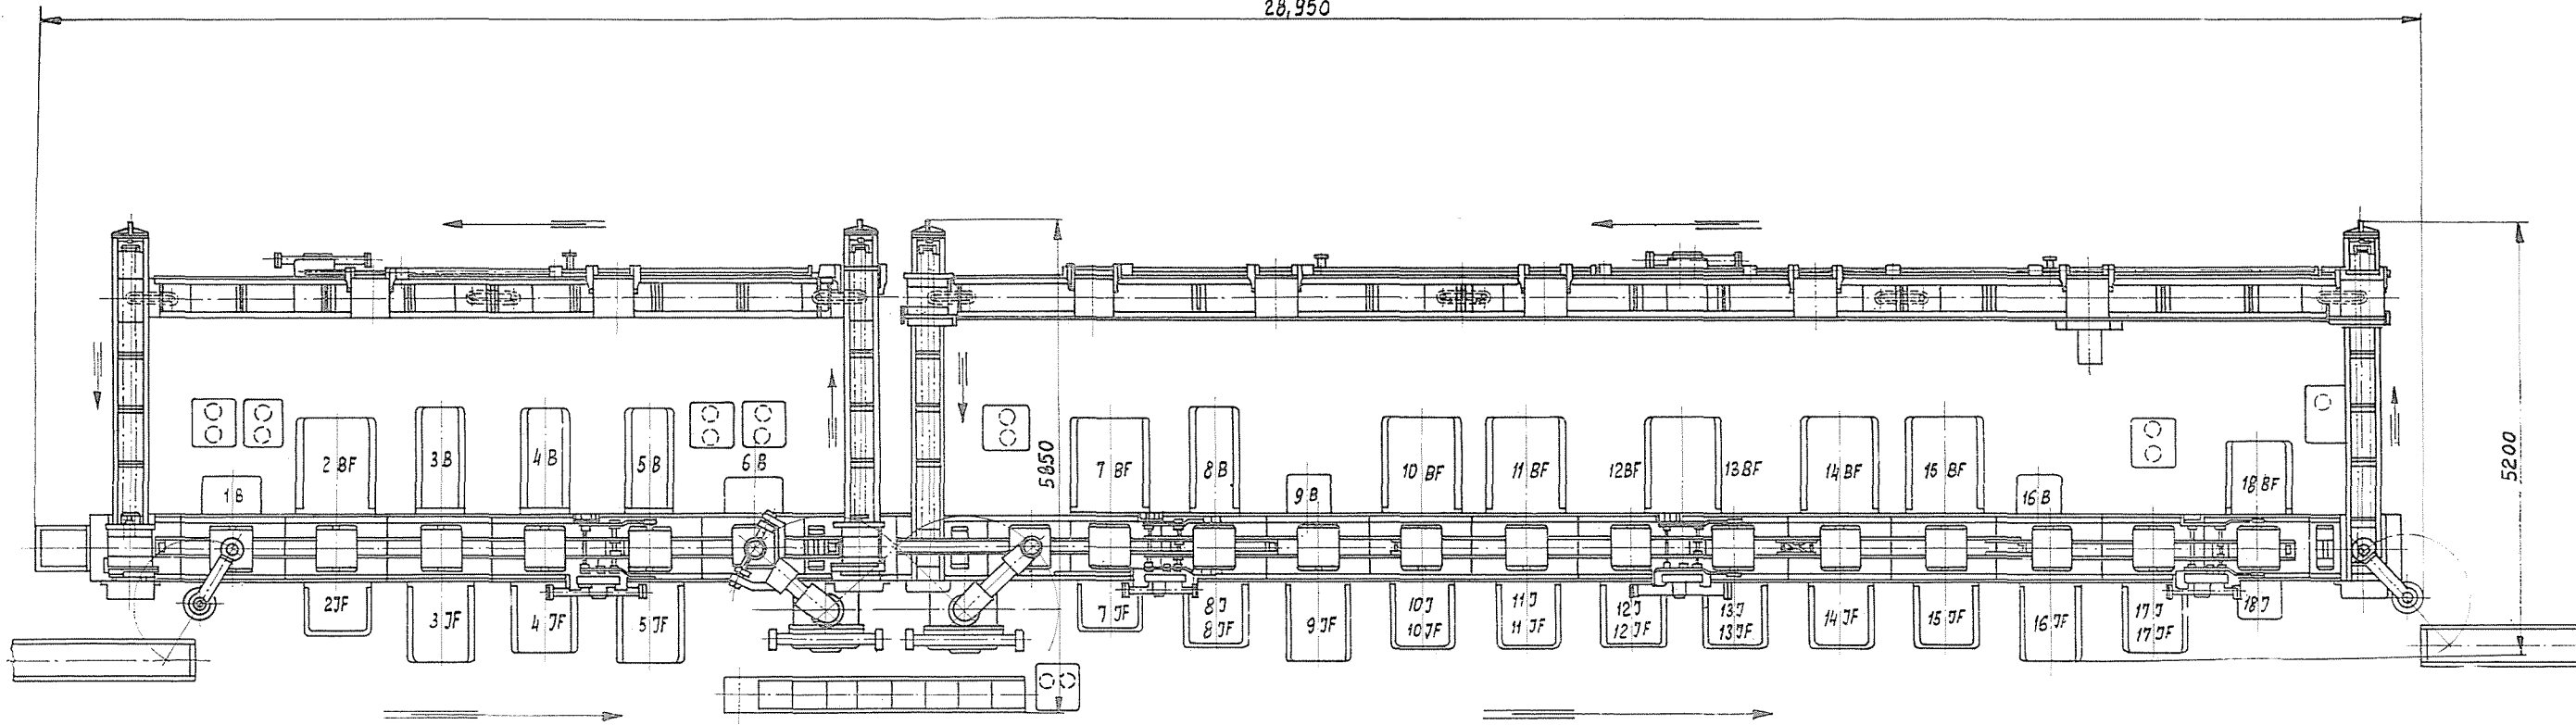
Arrangement diagram of the Type CSz 2 Transfer Machine
